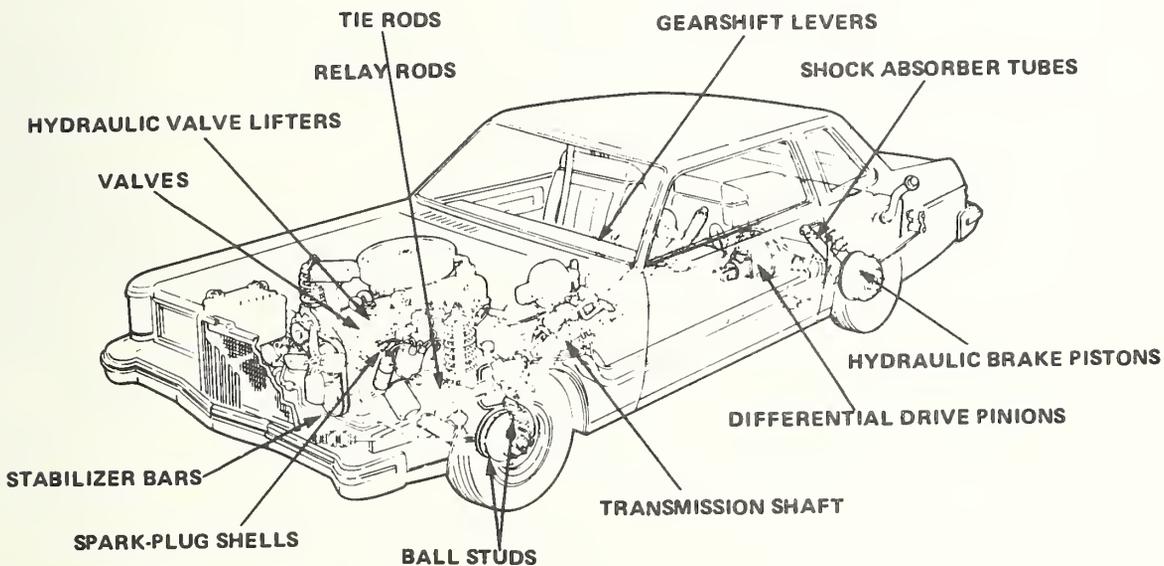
SCHEMATIC OF AUTOMOBILE SHOWING PARTS AND COMPONENTS WHICH ARE FORGED
